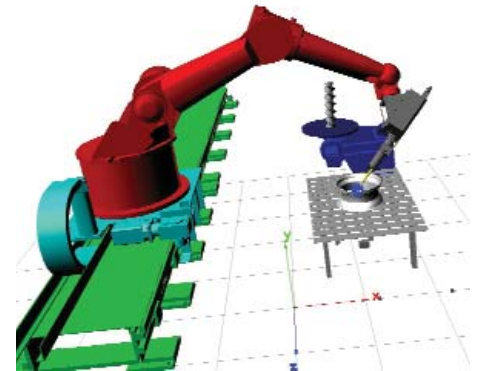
Visualization of a combined machine for the hardening and buildup welding with a diode laser
